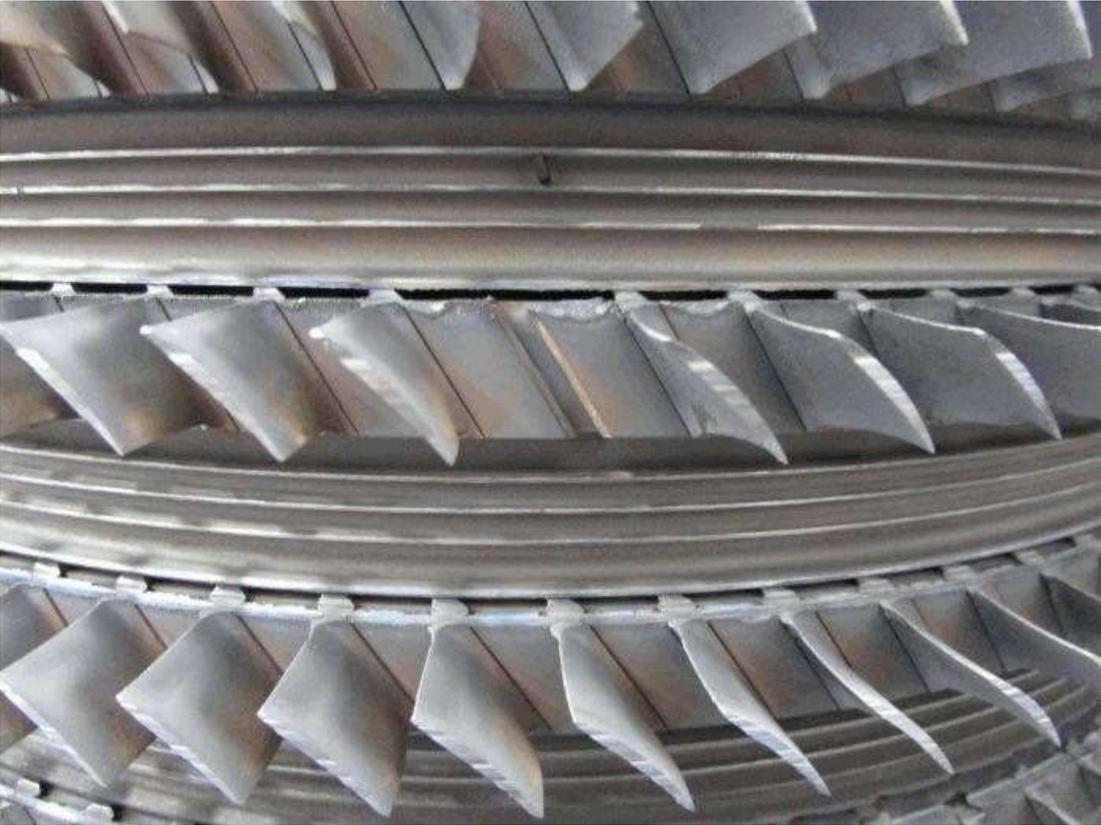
HIGH-PRESSURE COMPRESSOR WHEEL - DETAIL
